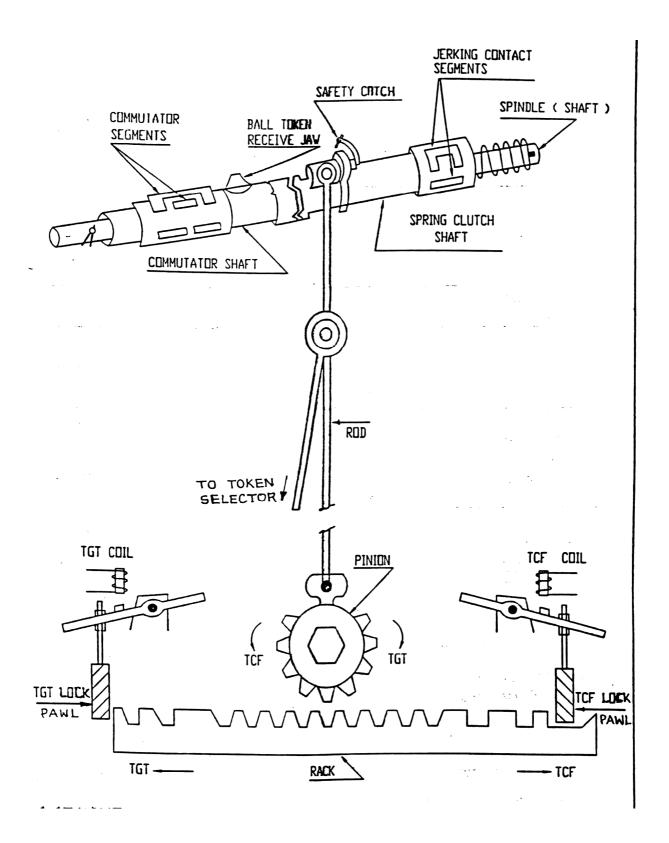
COMMUTATOR & SPRING CLUTCH SHAFT
